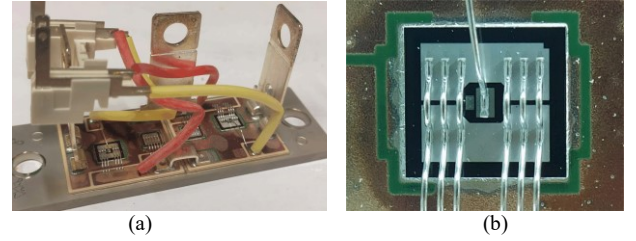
Test IGBT module. (a) Full view of the module. (b) IGBT chip geometry
